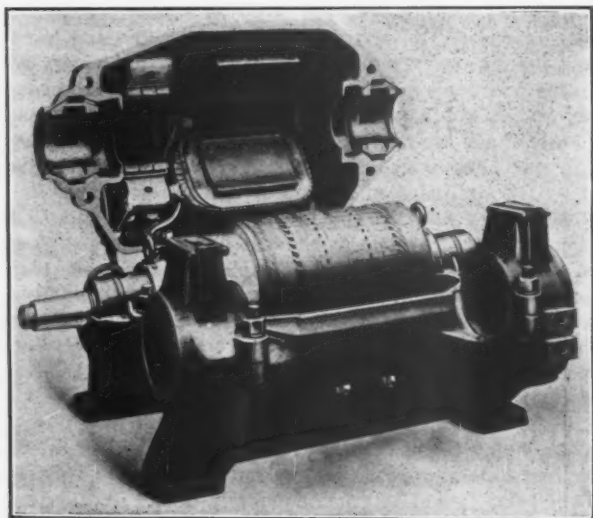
The Westinghouse Mill Motor with the Upper Half of the Frame Raised.
